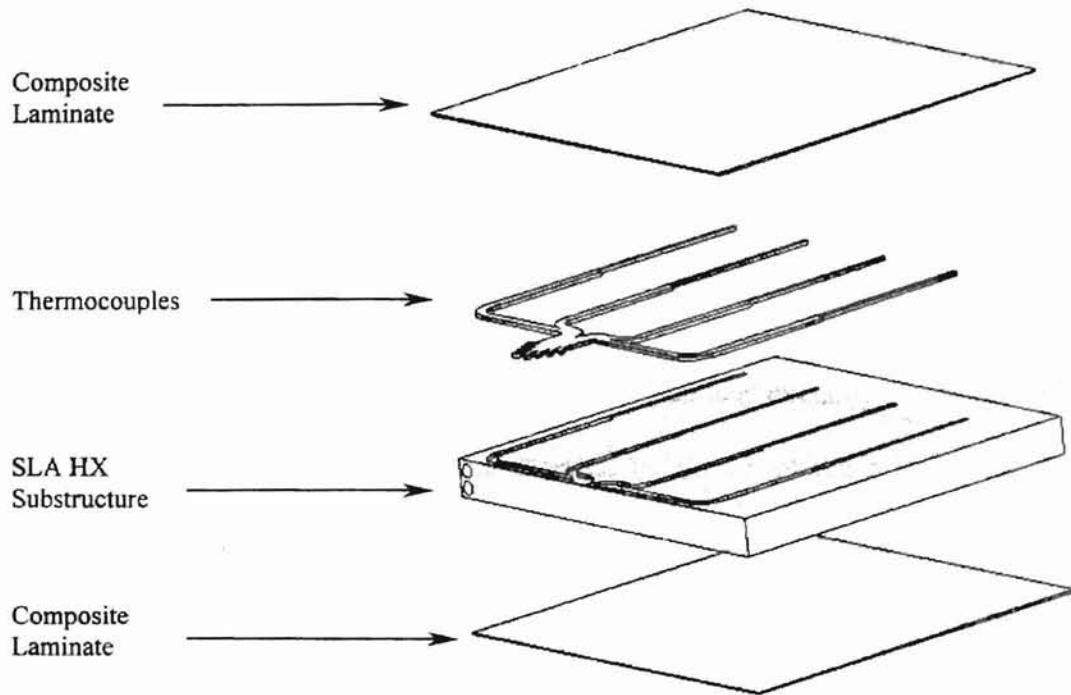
Assembly of SLA HX substructure, thermocouples, and composite
